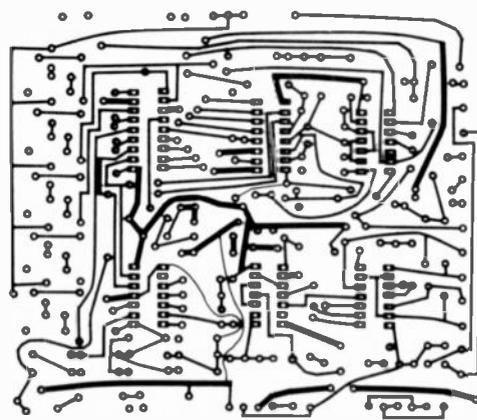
FOIL PATTERN of bottom-side of PC board shown half size.
